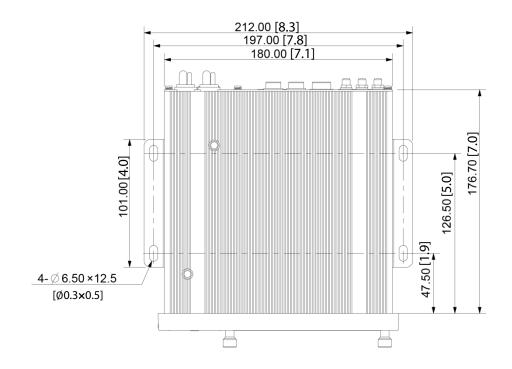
MNVR4104/4208-I lug installation dimensional drawing (Unit: mm [inch])
